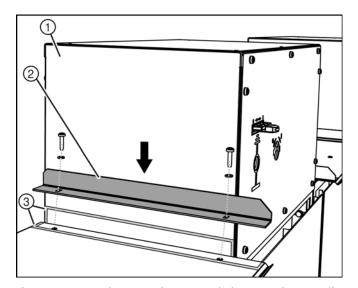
Example: Fastening an angle between intermediate panels and panels with make-proof earthing switches (basic scheme)
